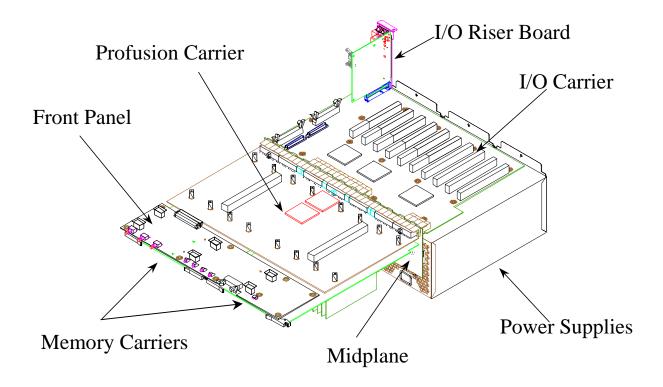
OPRF100 Board Set/System Board Locations within Server Chassis
